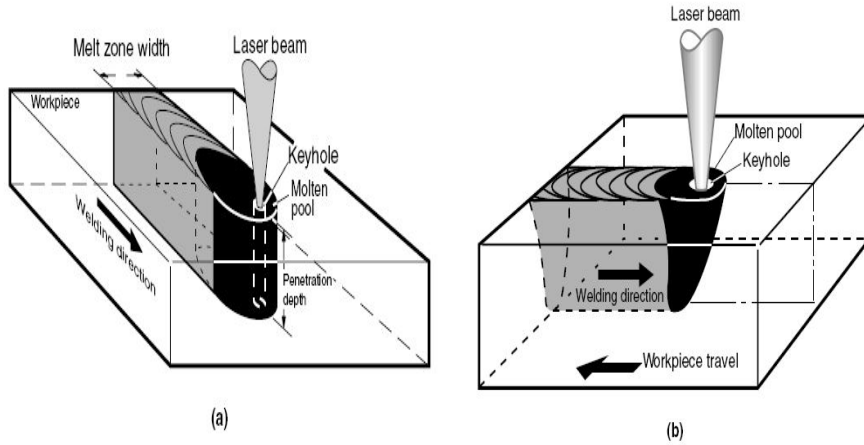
Schematic of the keyhole mode laser welding process.
